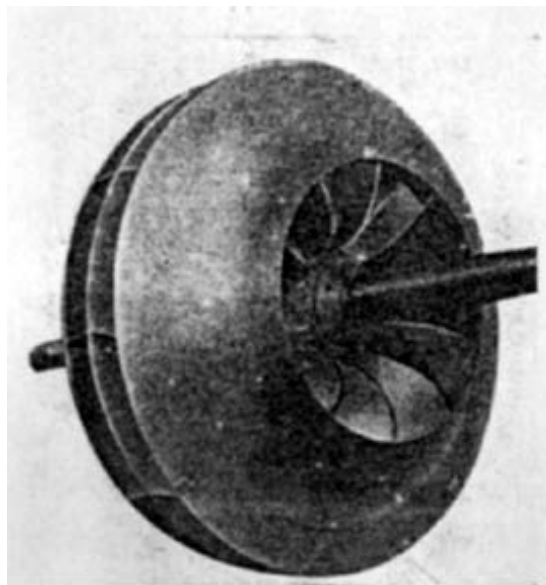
Fully welded impeller designed by MAN.
